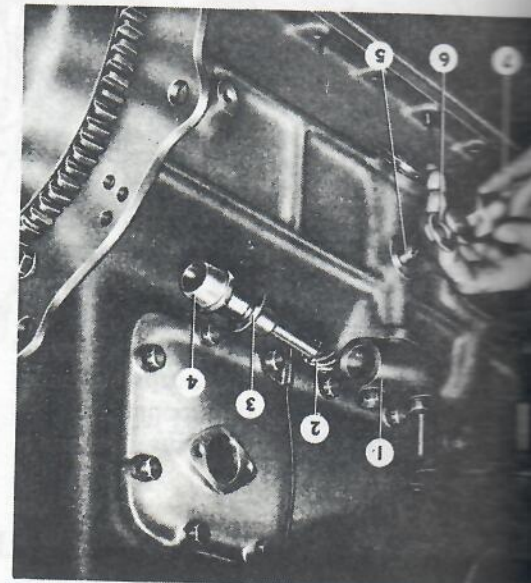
Pinion, 3. Washer, 4. Bush for pinion, 5. Oil locking screw, 6. Washer, 7. Locking cap nut.
